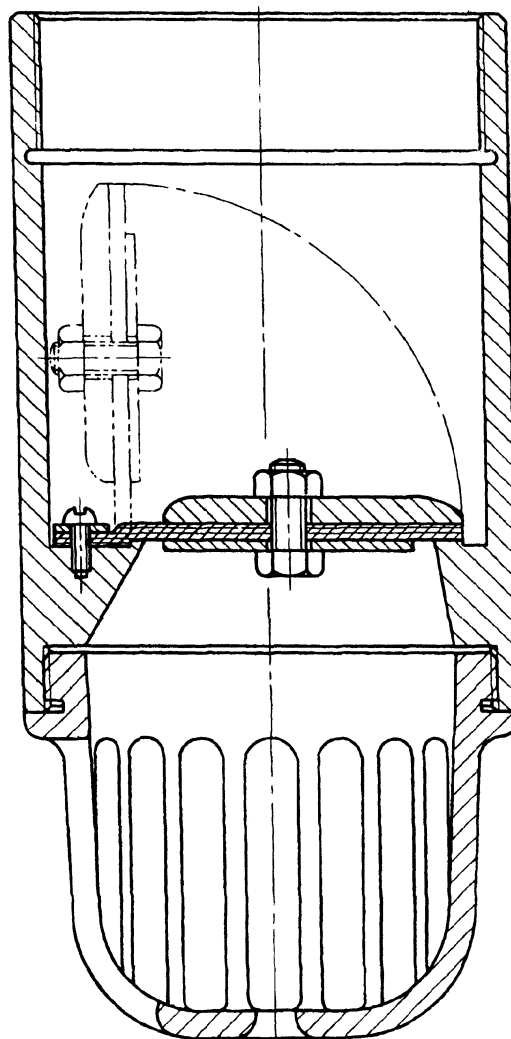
TYPICAL SECTIONAL DRAWING FOR A BORE WELL FOOT-VALVE
